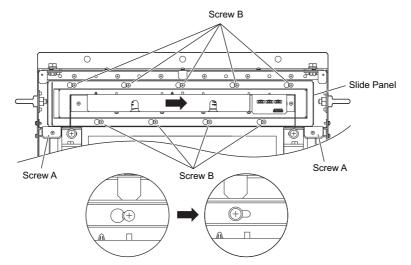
Removing the Fan Unit: 4A0515 and 4A0675
